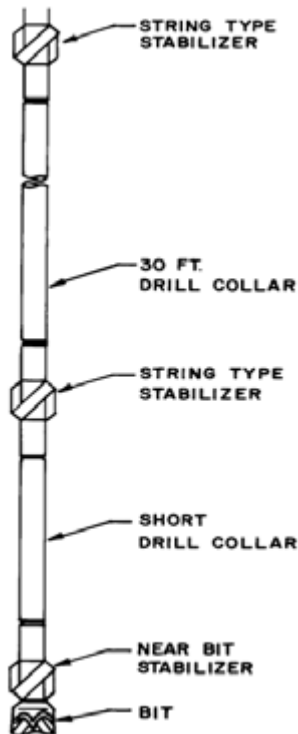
Typical bottomhole assembly for direct circulation rotary drilling operations.
